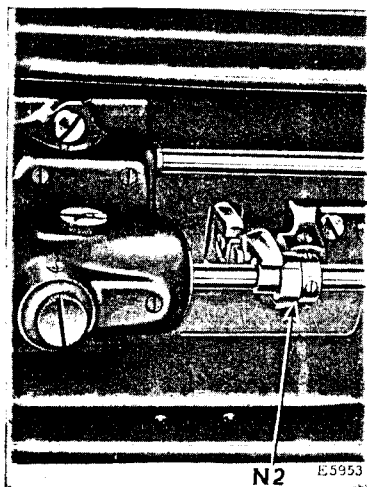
VIEW OF MACHINE 110 w 121 SHOWING ADJUSTMENT FOR TIMING THE KNIFE
